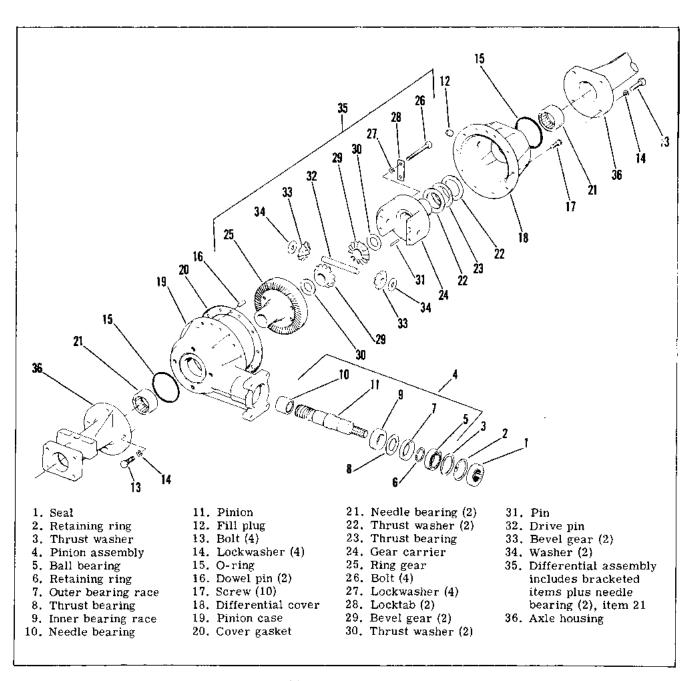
B-33. Differential Assembly (Late 1977 and Early 1978) - Exploded View
